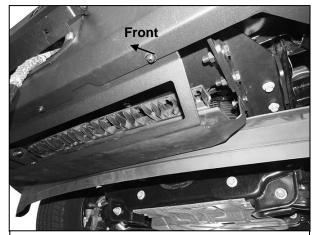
Slide CS1 Bumper between mounting tabs on Winch Tray assembly
